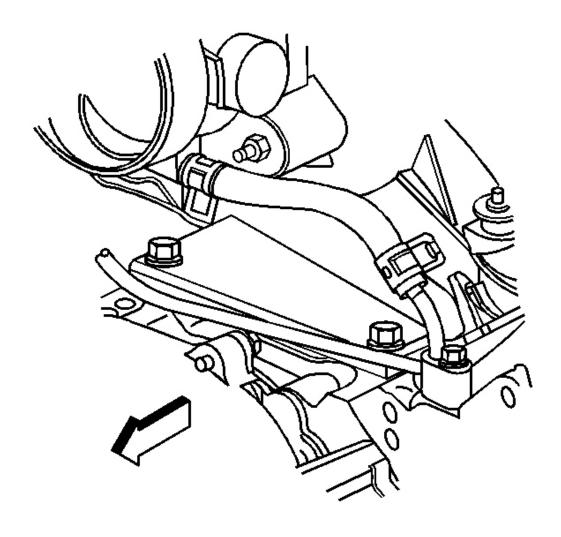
Coolant Air Bleed Hose & Pipe Courtesy of GENERAL MOTORS CORP.
